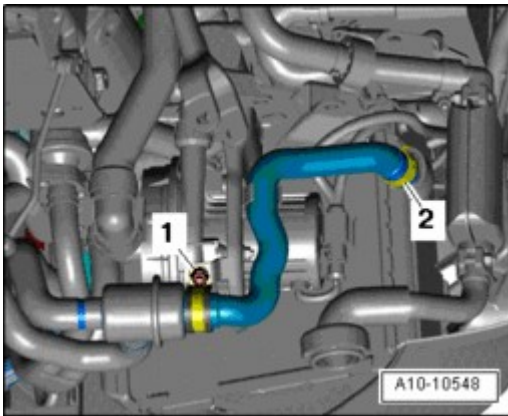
Right Auxiliary Cooler Coolant Hose & Nut
